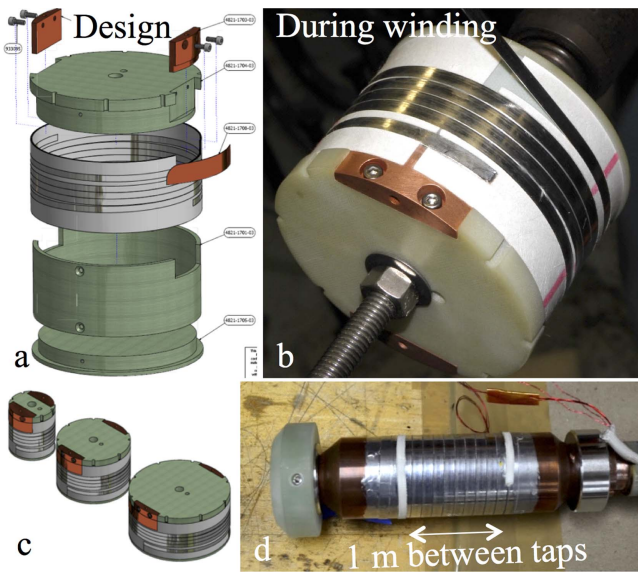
Coil and helical sample holder. (a) Coil design; (b) coil fabrication; (c) 51, 83, and 114 mm diameter coils; (d) helical sample holder.
